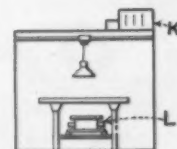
Front view of welding booth. K shows the resistance, and L the reacting coil.
